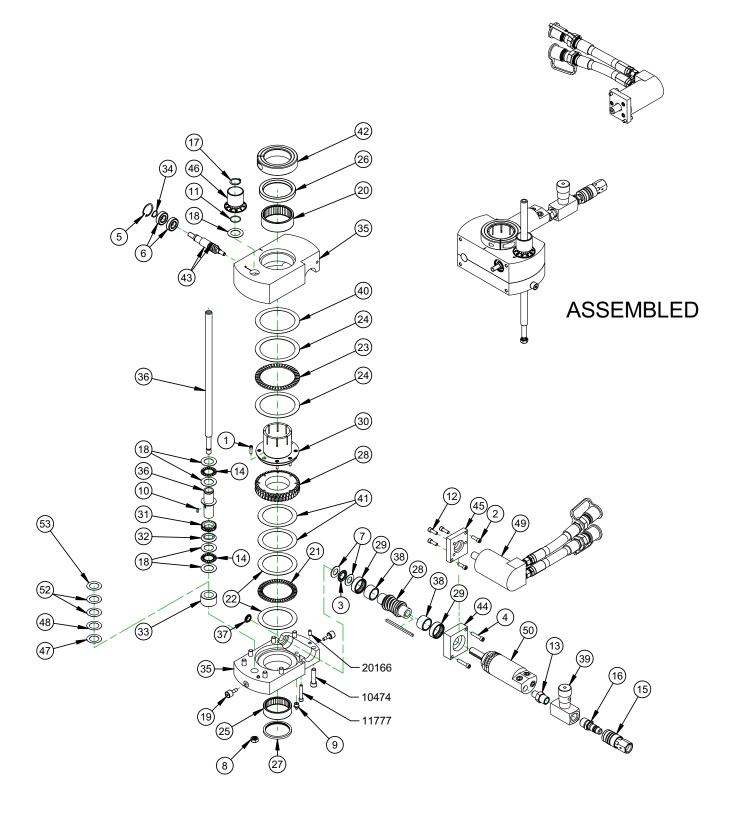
ROTATIONAL DRIVE ASEMBLY (P/N 31024)
